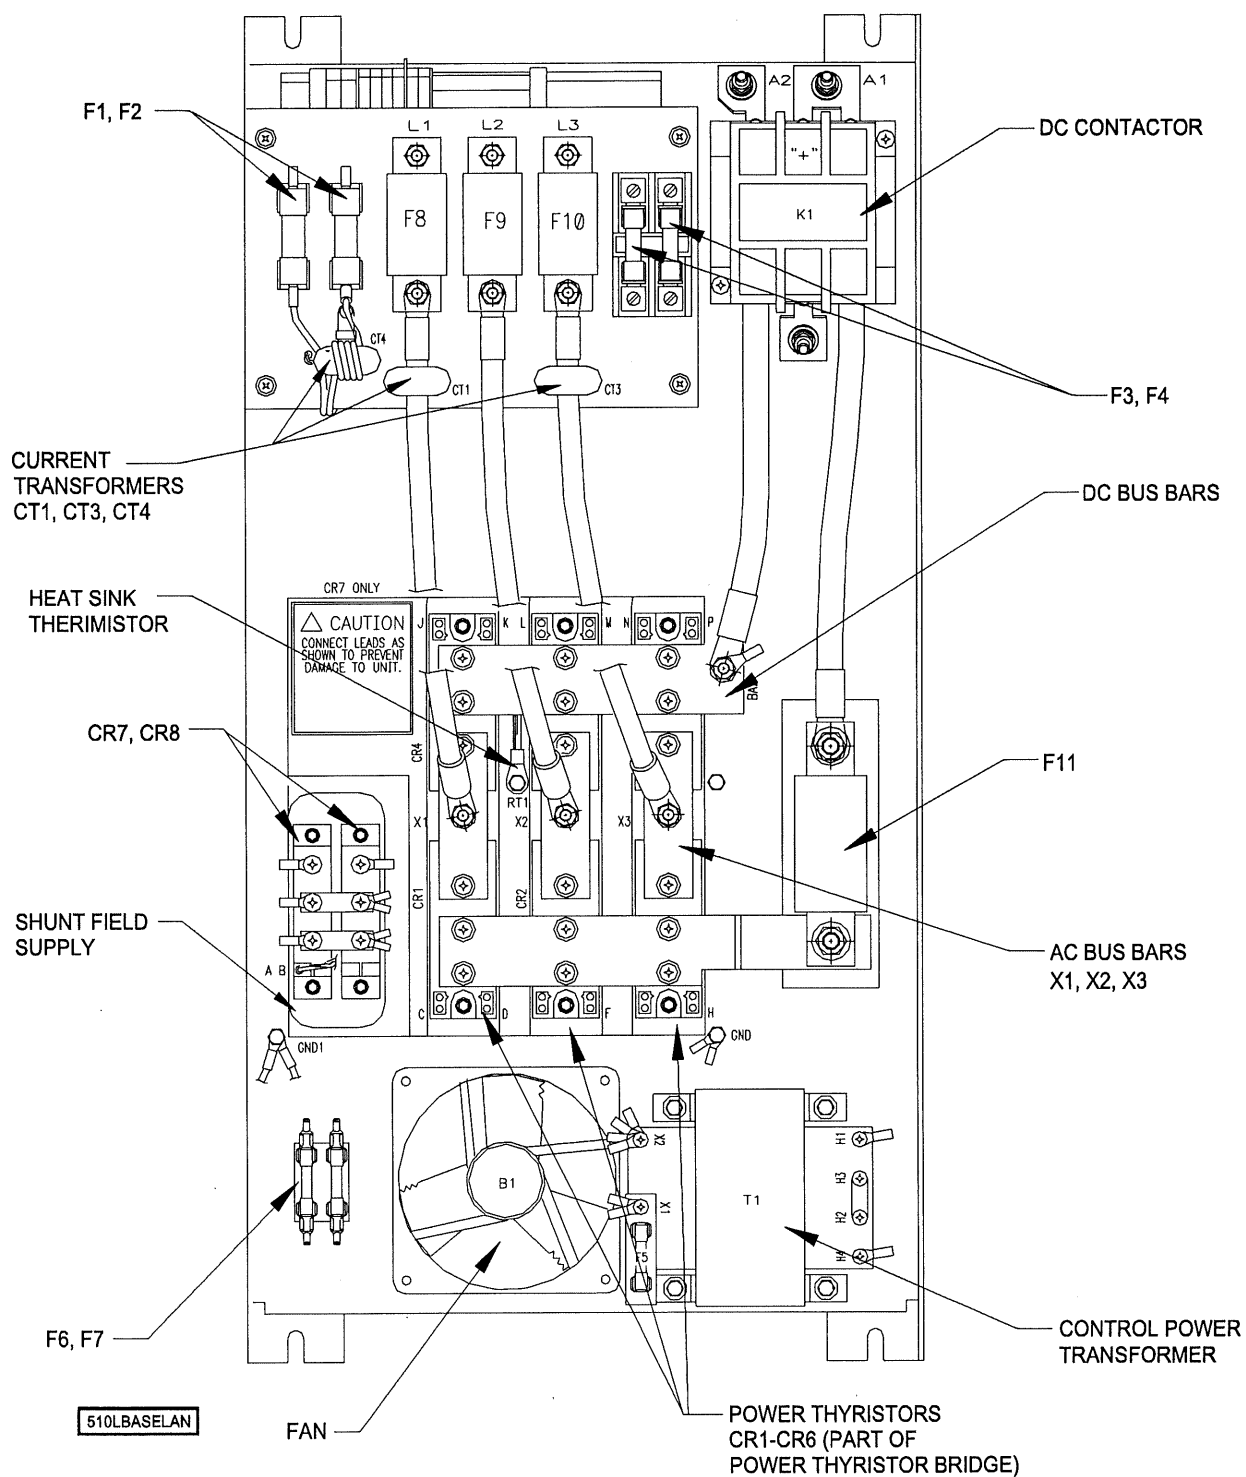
Drive Base Assembly (510 ADC and Below)
